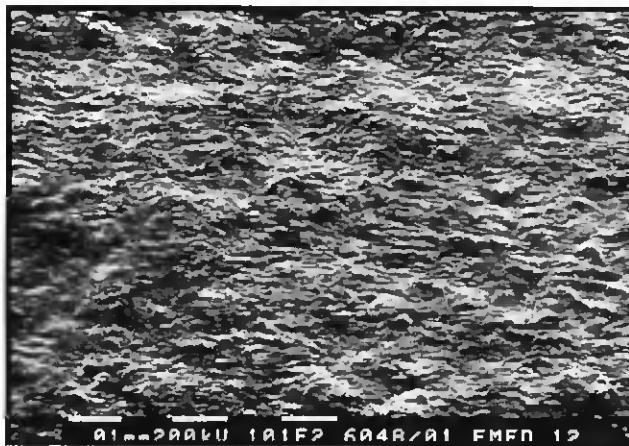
Weld interface surface after fracture, cold roll welding steel-steel with one-sided semibright Ni plating (FMFD),  $Y = 0.583$ .
